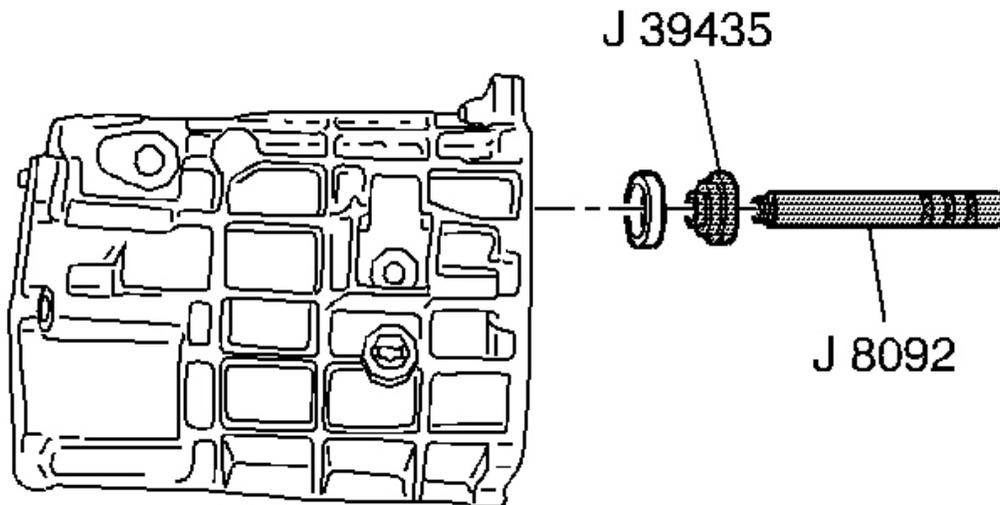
Installing Mainshaft Bearing Race Using J 8092 & J 39435
